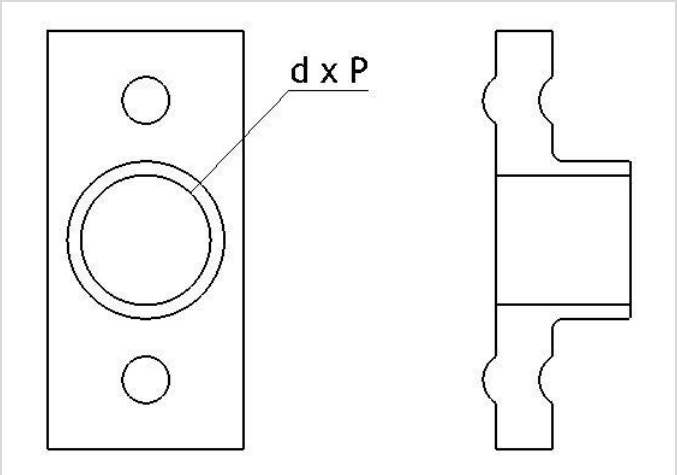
Subaru & Toyota Weld Nut Standard
